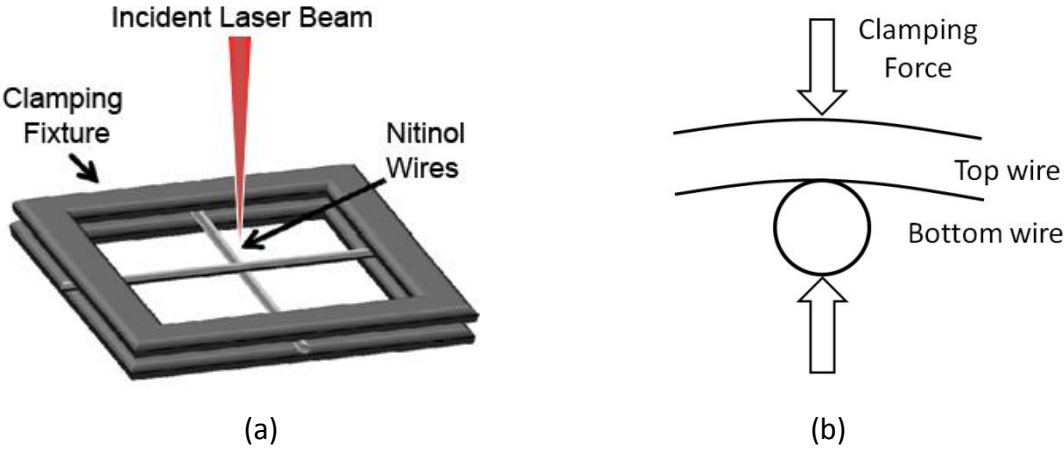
Schematic of (a) clamping fixture and (b) clamping force
